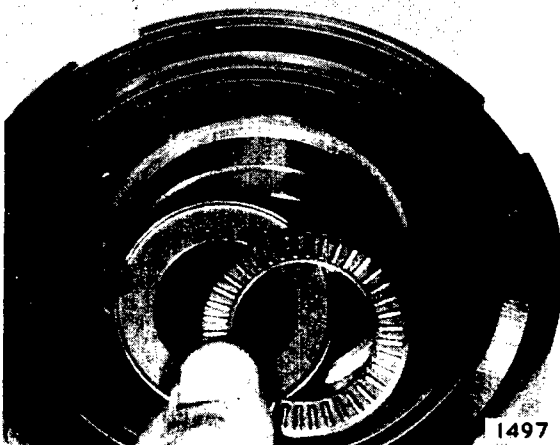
Fitting the thrust plate and needle bearing
